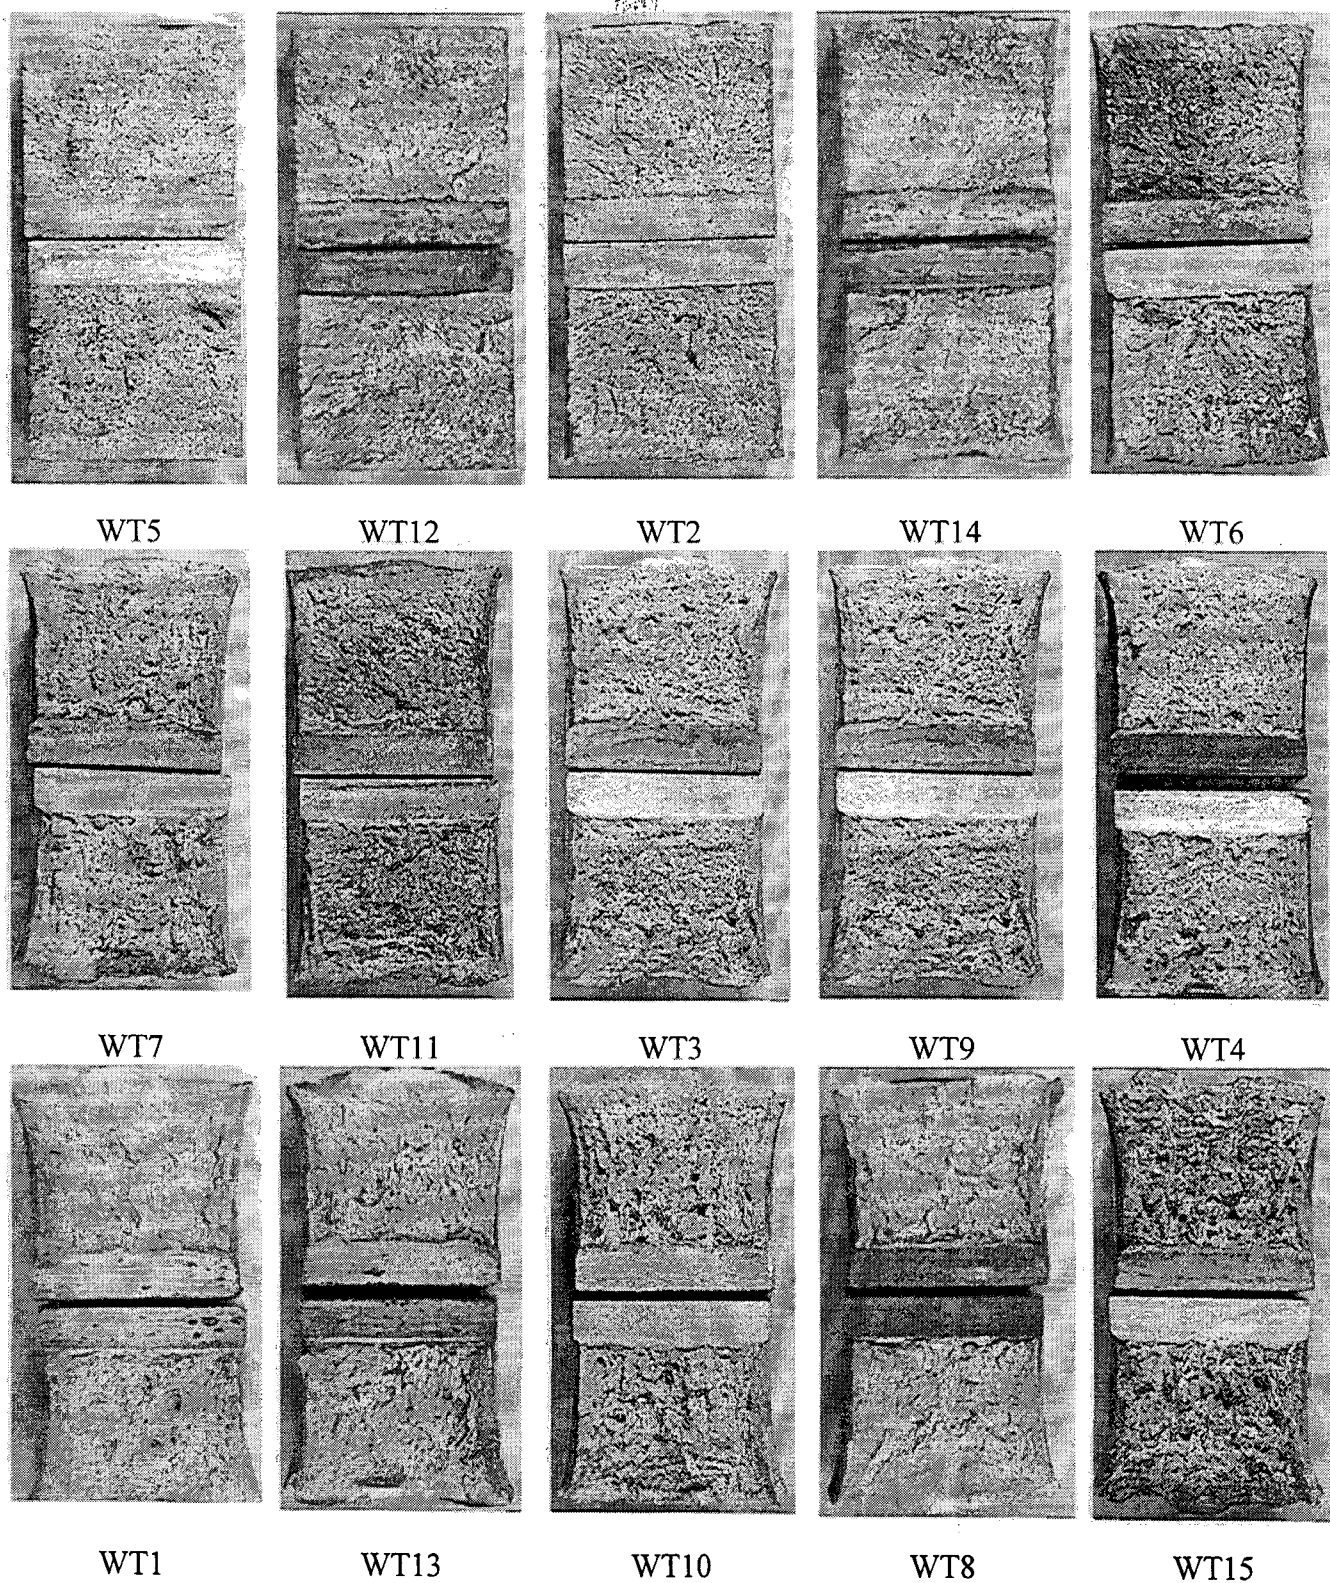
Charpy Impact Specimen Fracture Surfaces for Watts Bar Unit 1 Reactor Vessel Intermediate Shell Forging 05 (Axial Orientation)
